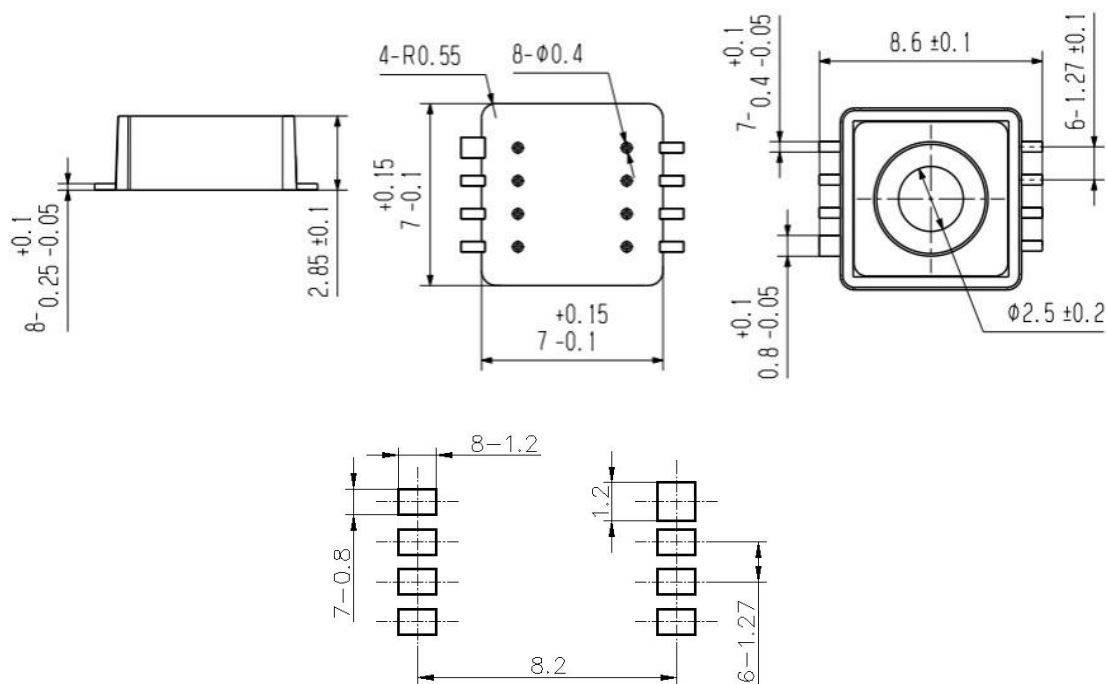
Sensor dimensions and recommended PCB pad dimensions
